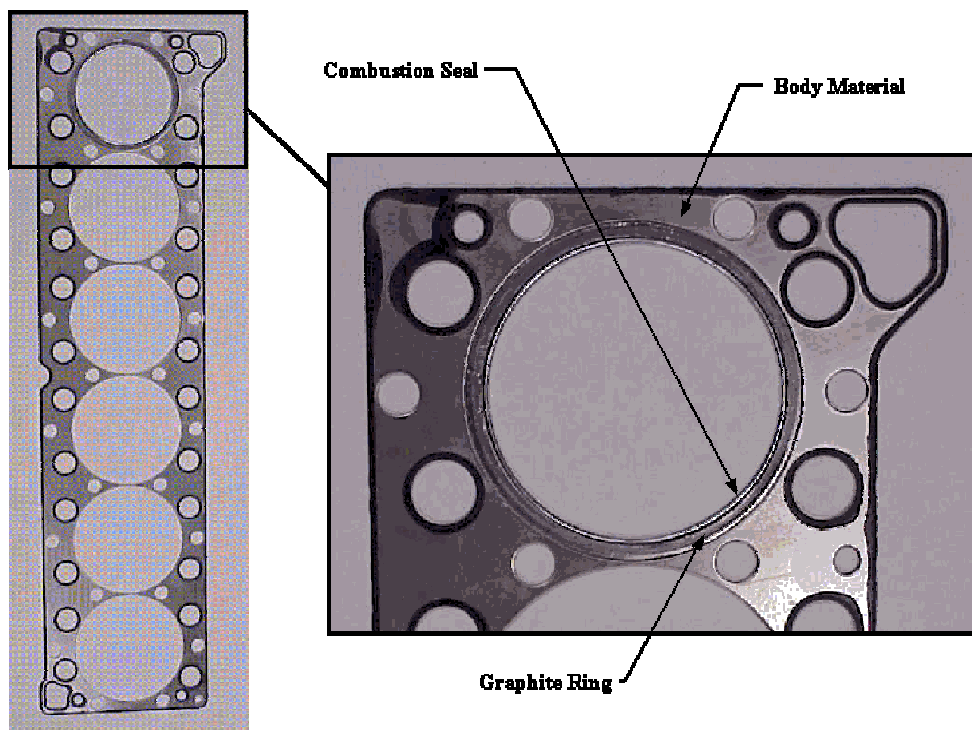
Picture of ISX Engine's Cylinder Head Gasket
